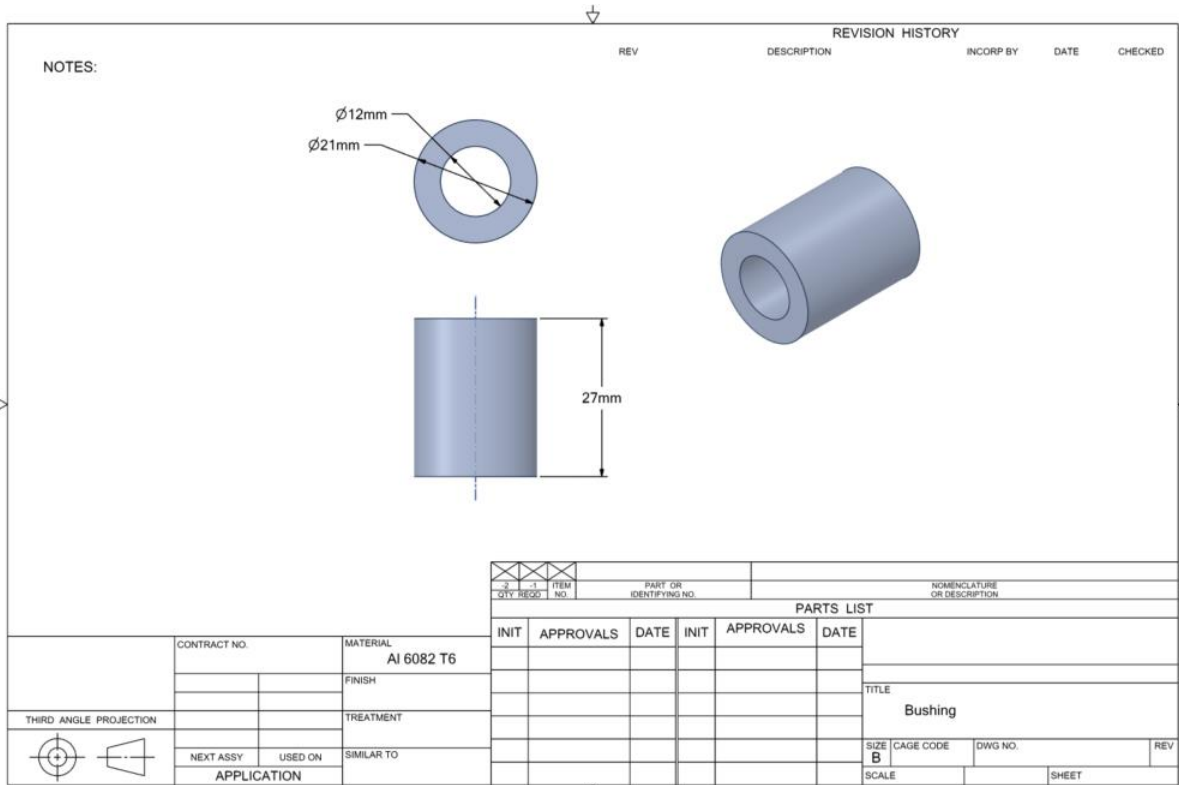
Aluminium 6082 T6 Bushing (Bolt Sleeve) Drawing
